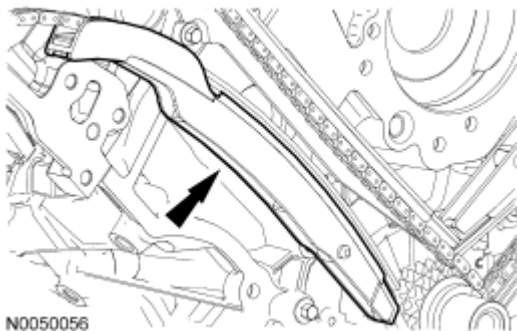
Locating RH Primary Timing Chain Tensioner Arm
